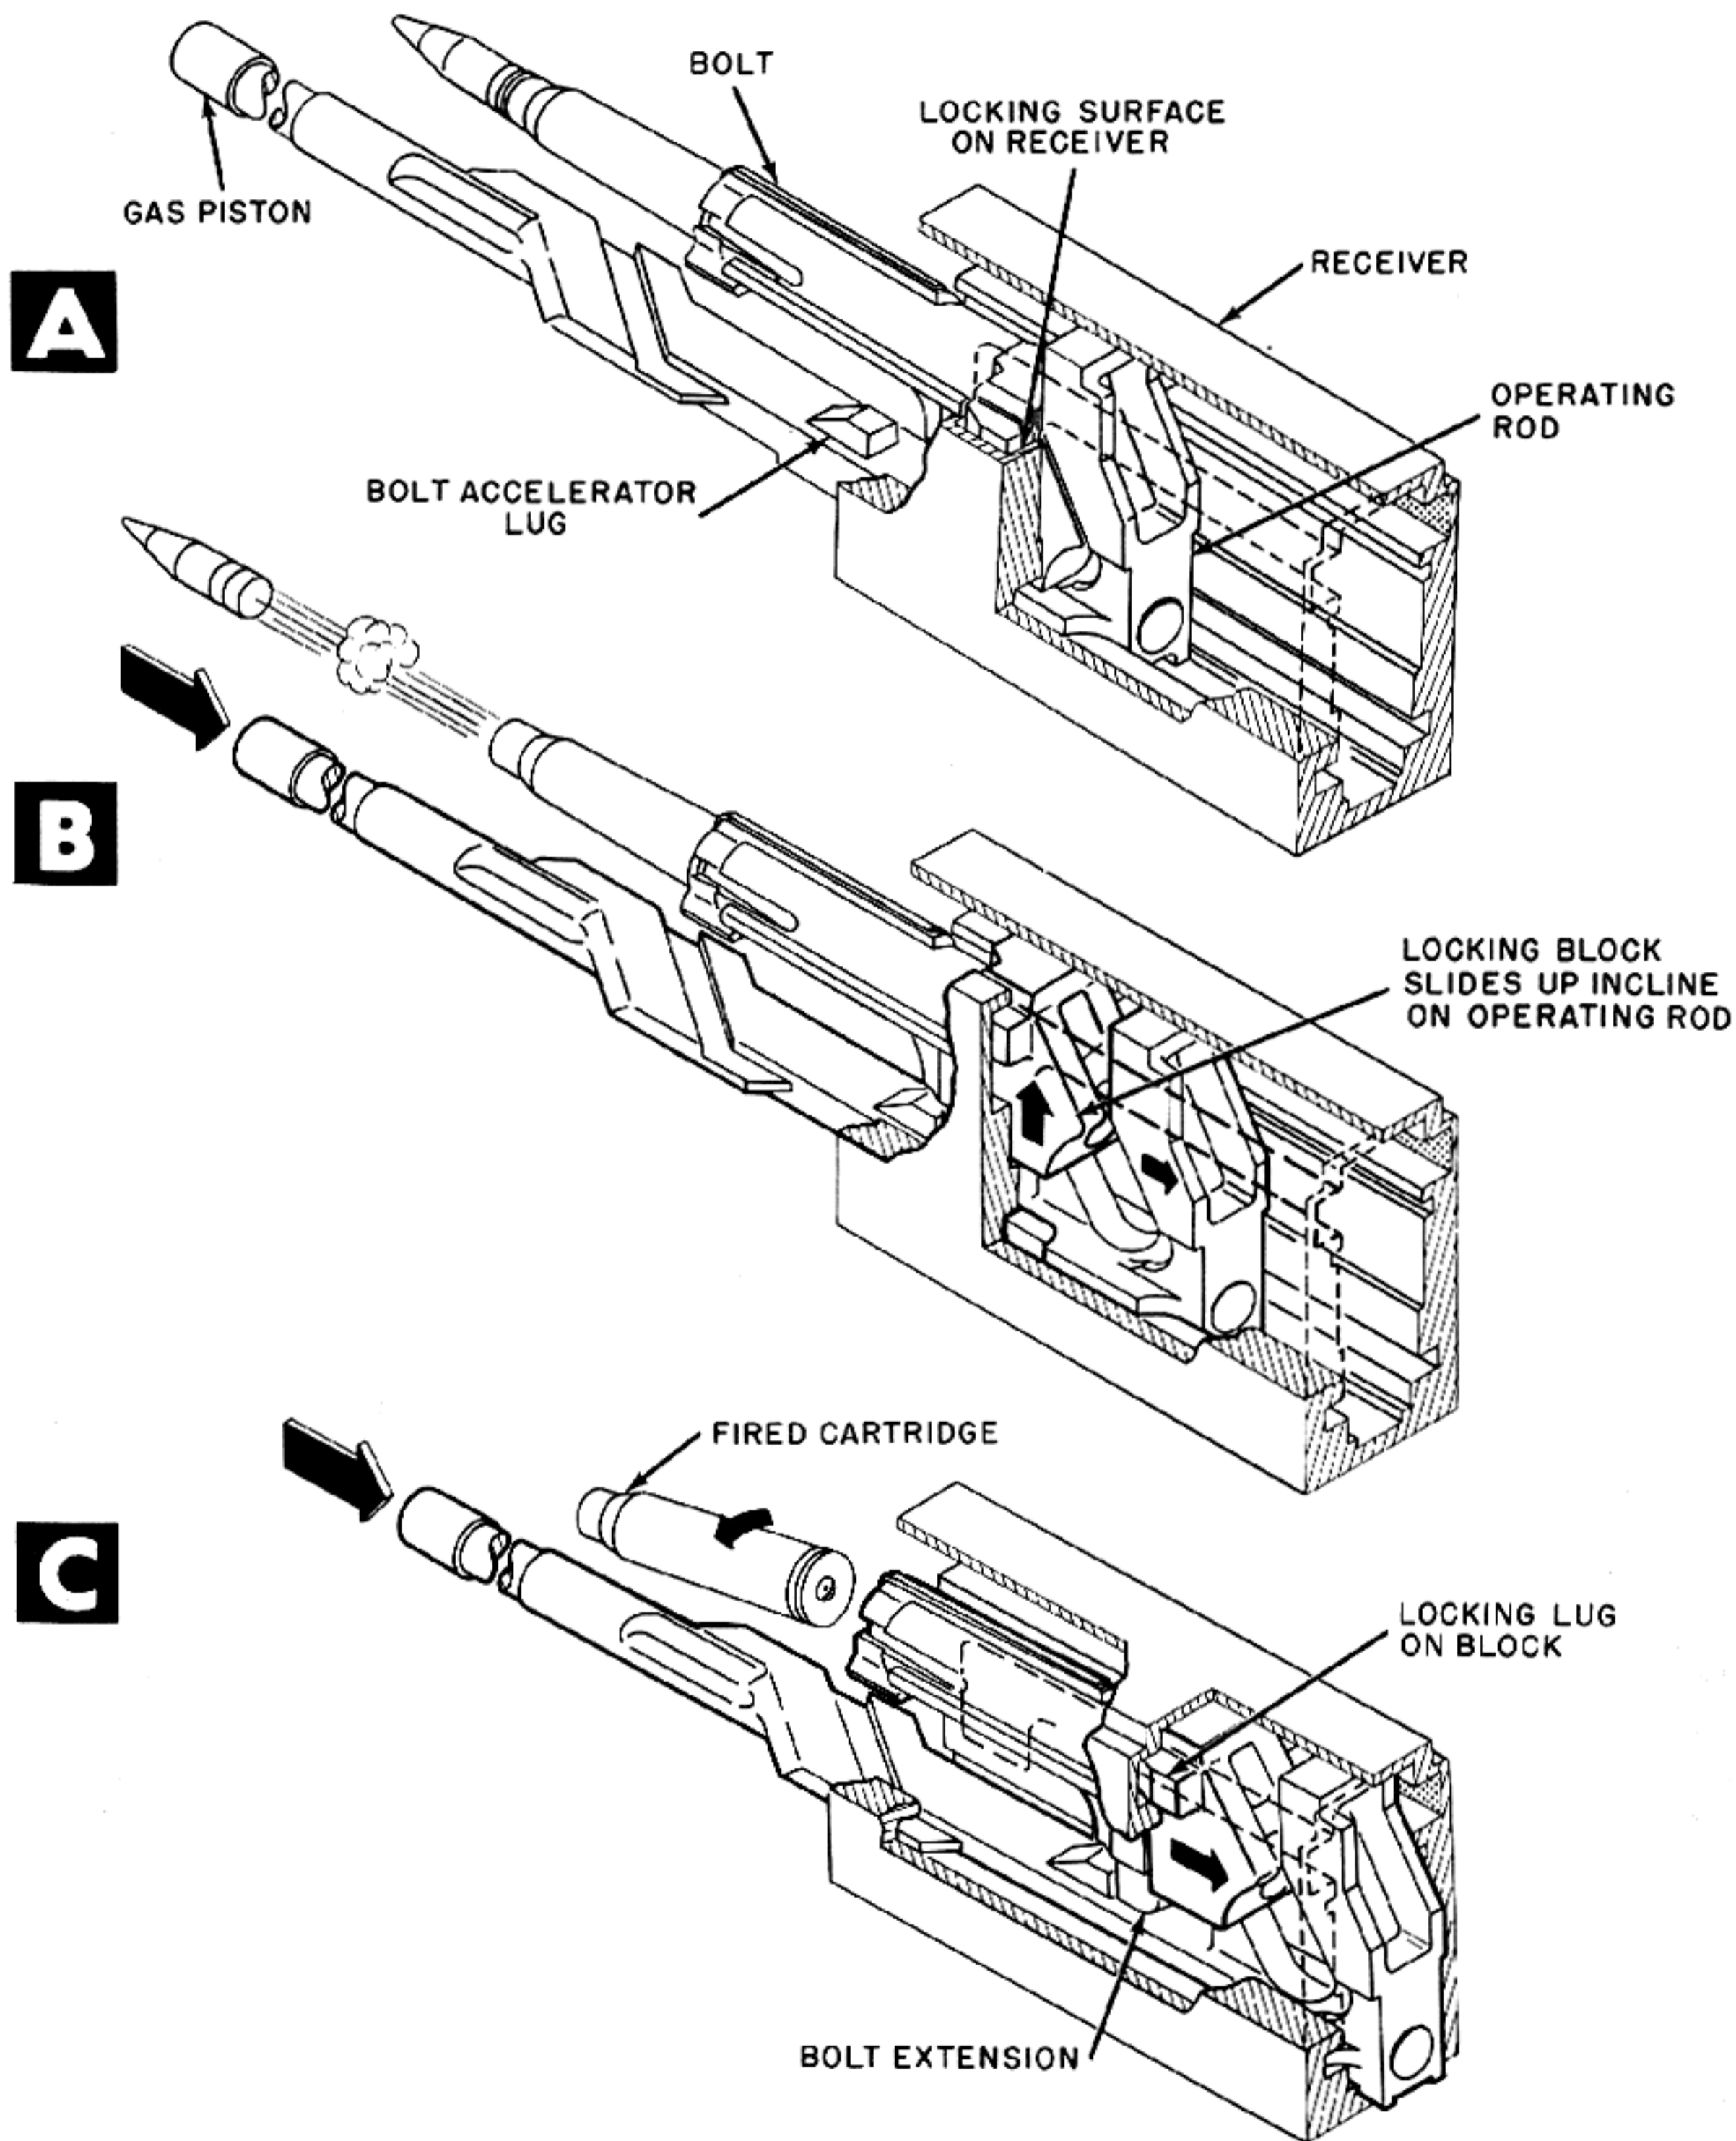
Operating Rod Cams Locking Block Free of Locking Surfaces of Receiver.
